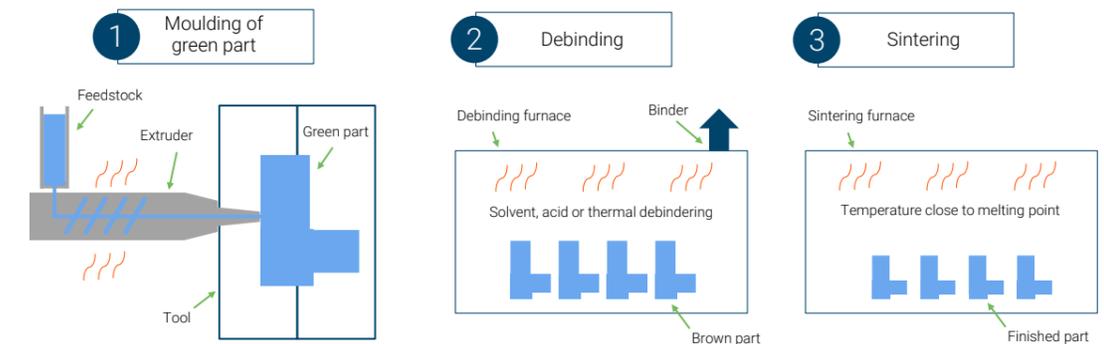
The Metal Injection Moulding process (Courtesy Ampower)
